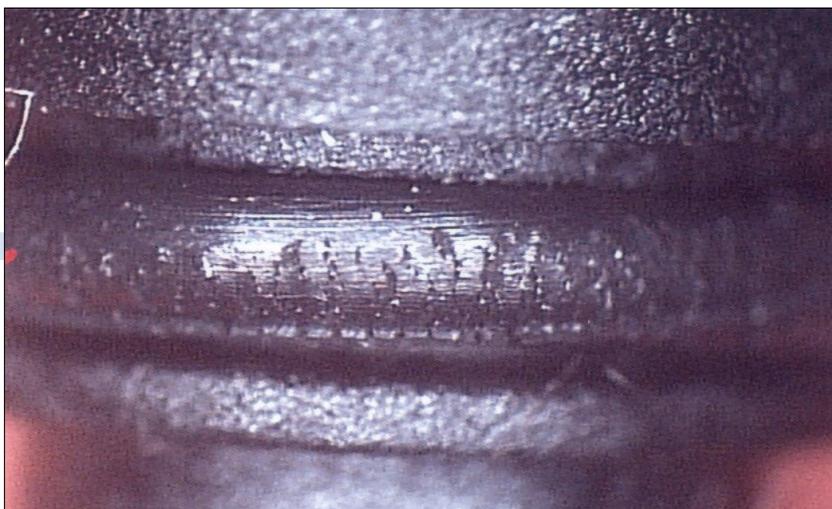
The ozone cracks resemble fatigue cracks - here ozone cracks using the example of an NBR O-ring
